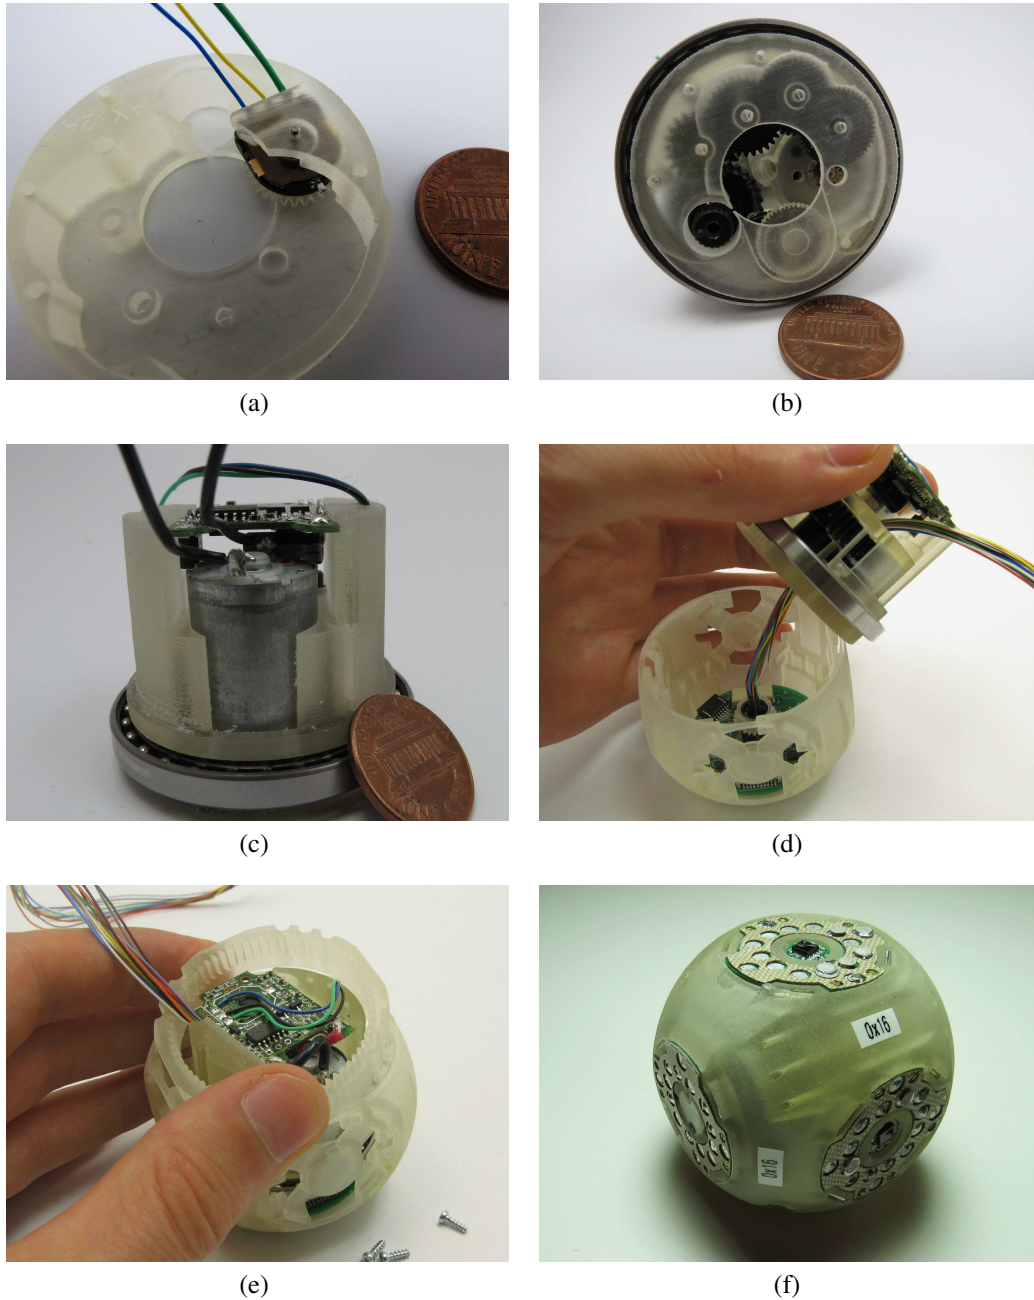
Photographs of actuation module assembly process. (a) Potentiometer enclosure cap: The top part of the servo motor assembly houses the potentiometer (b) Servo motor assembly, top view. (c) Servo motor assembly, side view. (d) The wires connecting the rotating parts are routed through the center of the gearbox. (e) Inserting a 3D-printed internal gear which acts as an additional reduction stage and clamps the ball bearing into the cube shell. (f) Completely assembled actuation module.
